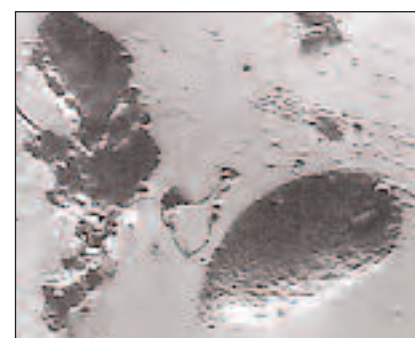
Surface porosity on a 14ct yellow gold casting
